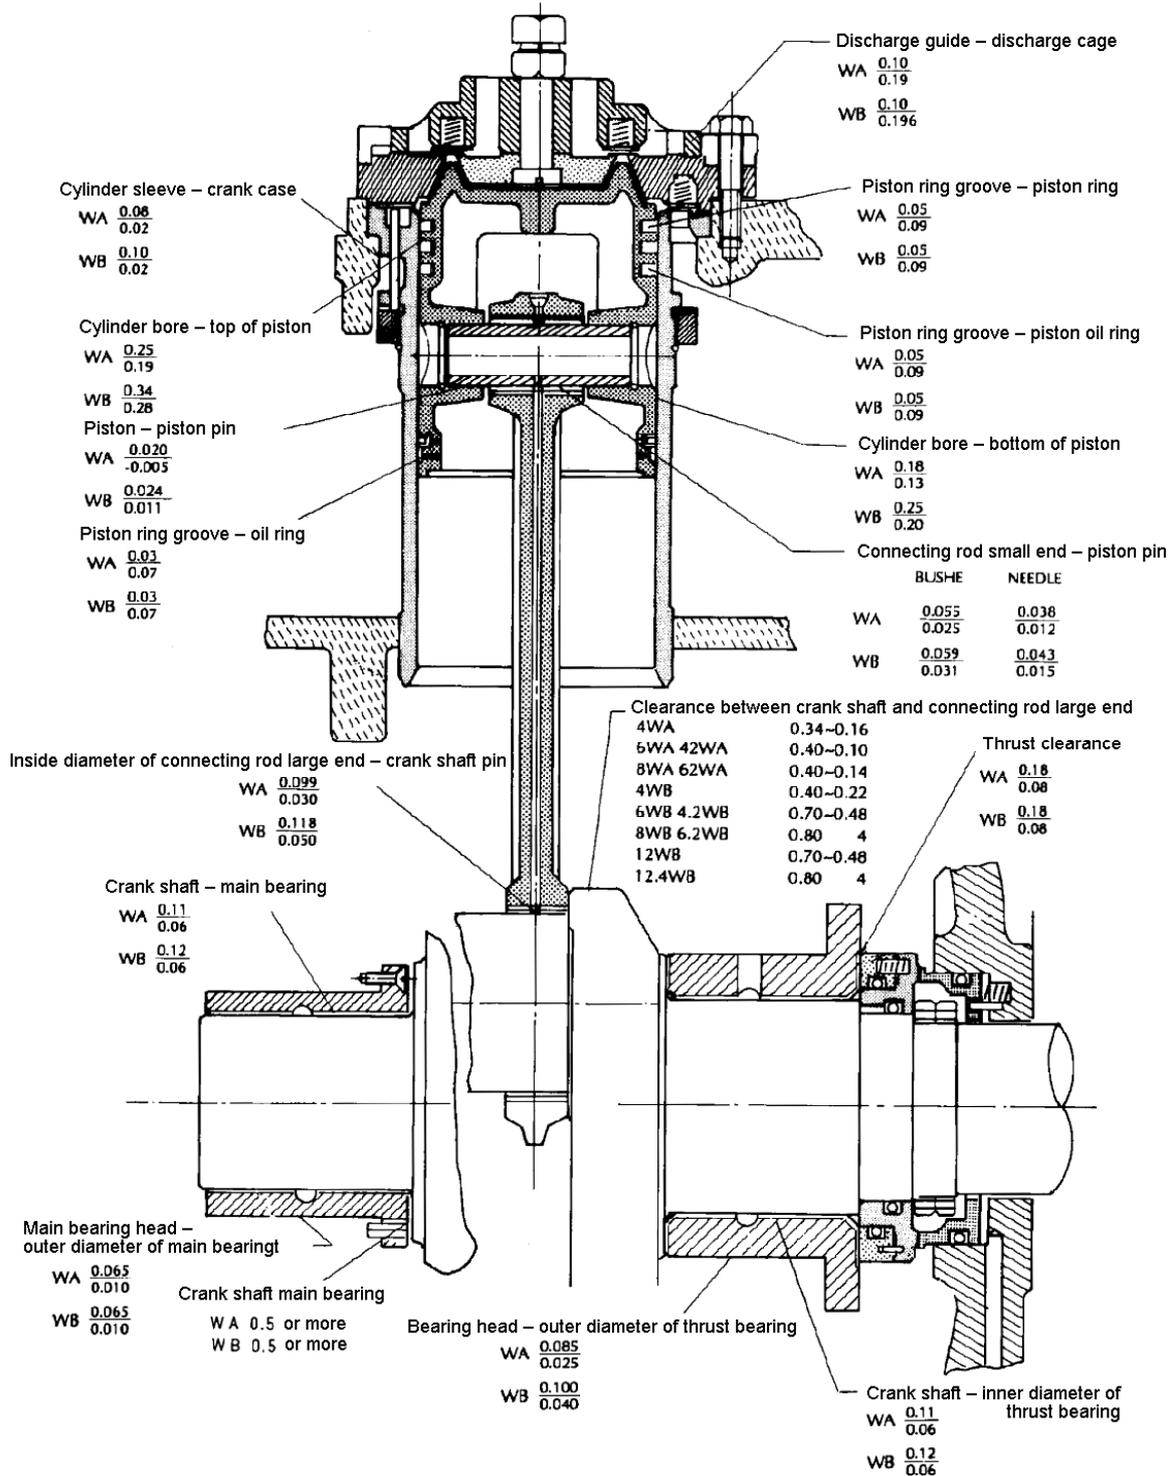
Standard Initial Assembly Clearance for WA/WB Type Compressors
